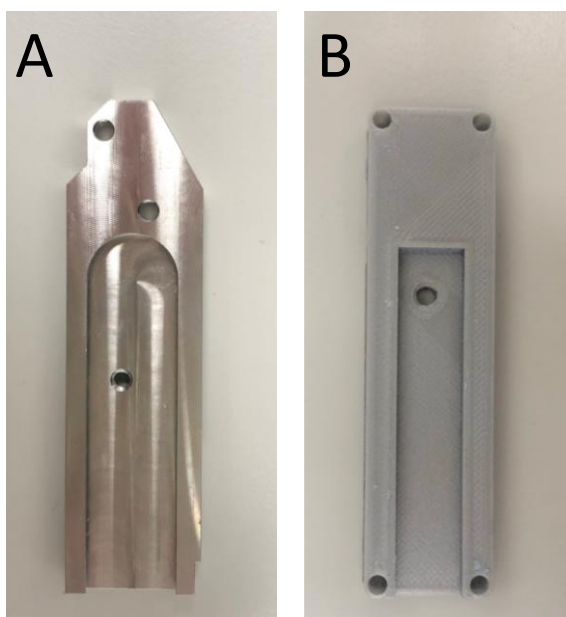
A) Photograph of the stainless-steel base from the Waters universal sprayer probe (P/N: 700003890), with all other connecting components removed. B) Photograph of the 3D printed base used to hold the microfluidic chip in the push source solution assembly. This plastic component (polylactic acid, PLA) replaces the stainless-steel base in A.
